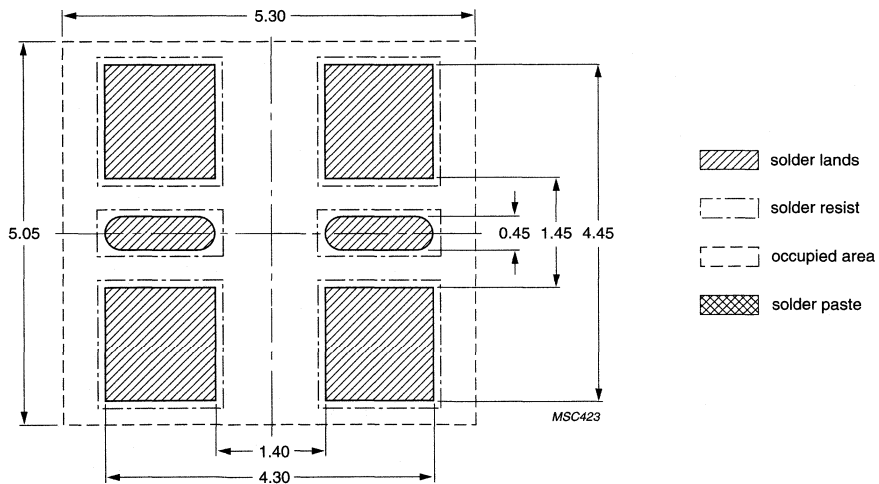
Wave soldering footprint for SOT457 (SC-74).
